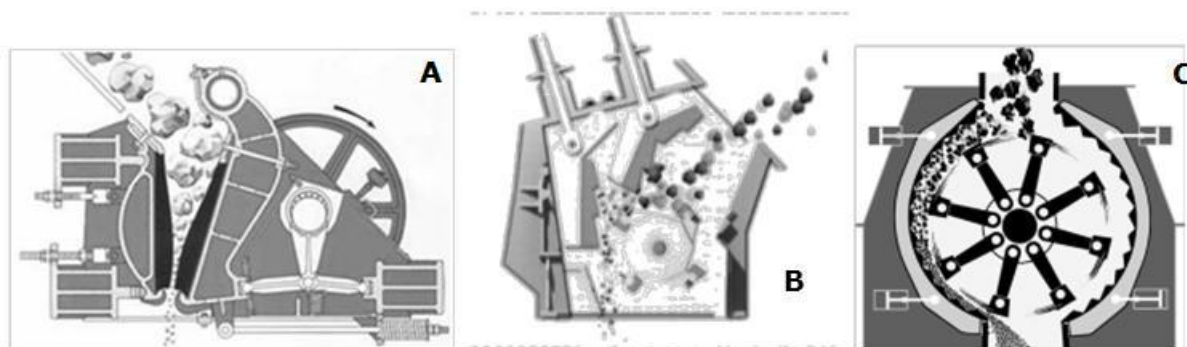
Types of crushers; Jaw crusher (A), Impact crusher (B), Hammermill (C)
